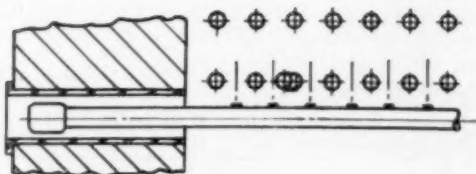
Incorrect. Jet impinging on warped or distorted tube will cut the tube.
